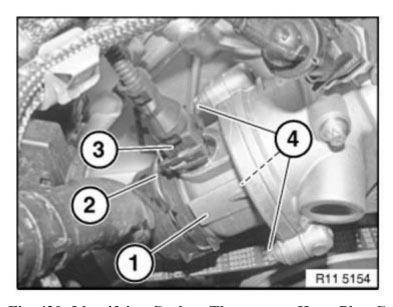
Identifying Coolant Thermostat, Hose, Plug Connection And Screw Courtesy of BMW OF NORTH AMERICA, INC.
